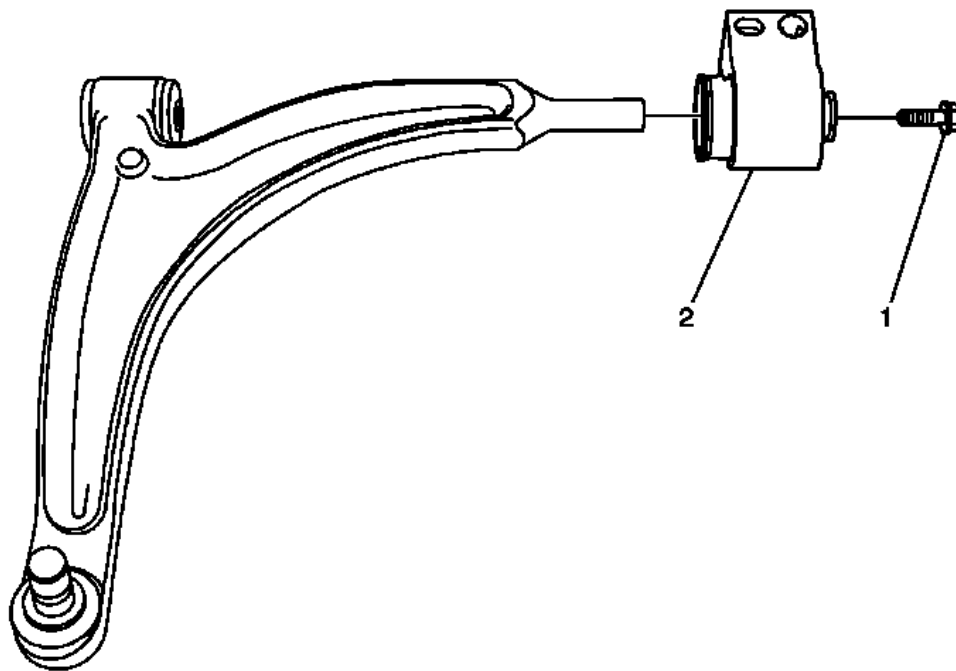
Front Lower Control Arm Rear Bushing & Bolt (GNA, GNB)
